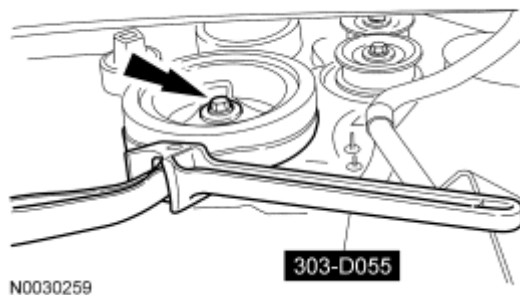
Holding Crankshaft Pulley Using Special Tool (303-D055)
